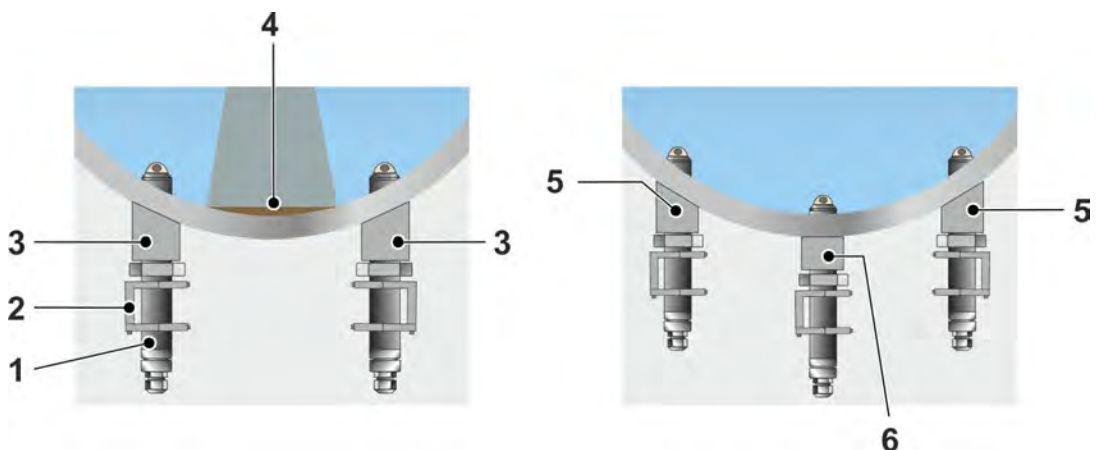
Installation example: 1x pipe sensor with straight welding nozzle
